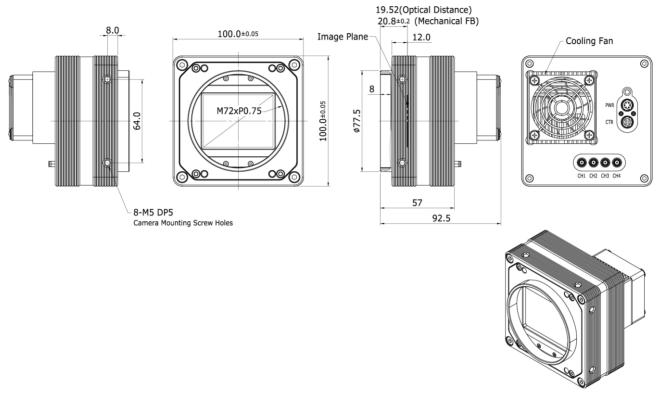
Mechanical Dimension for VC-151MX-6 M72-mount
